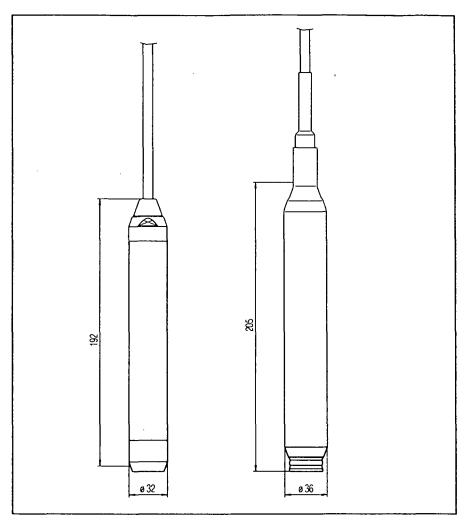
Dimensions VEGAWELL 72, left: version deep wells, right: version PE coating
